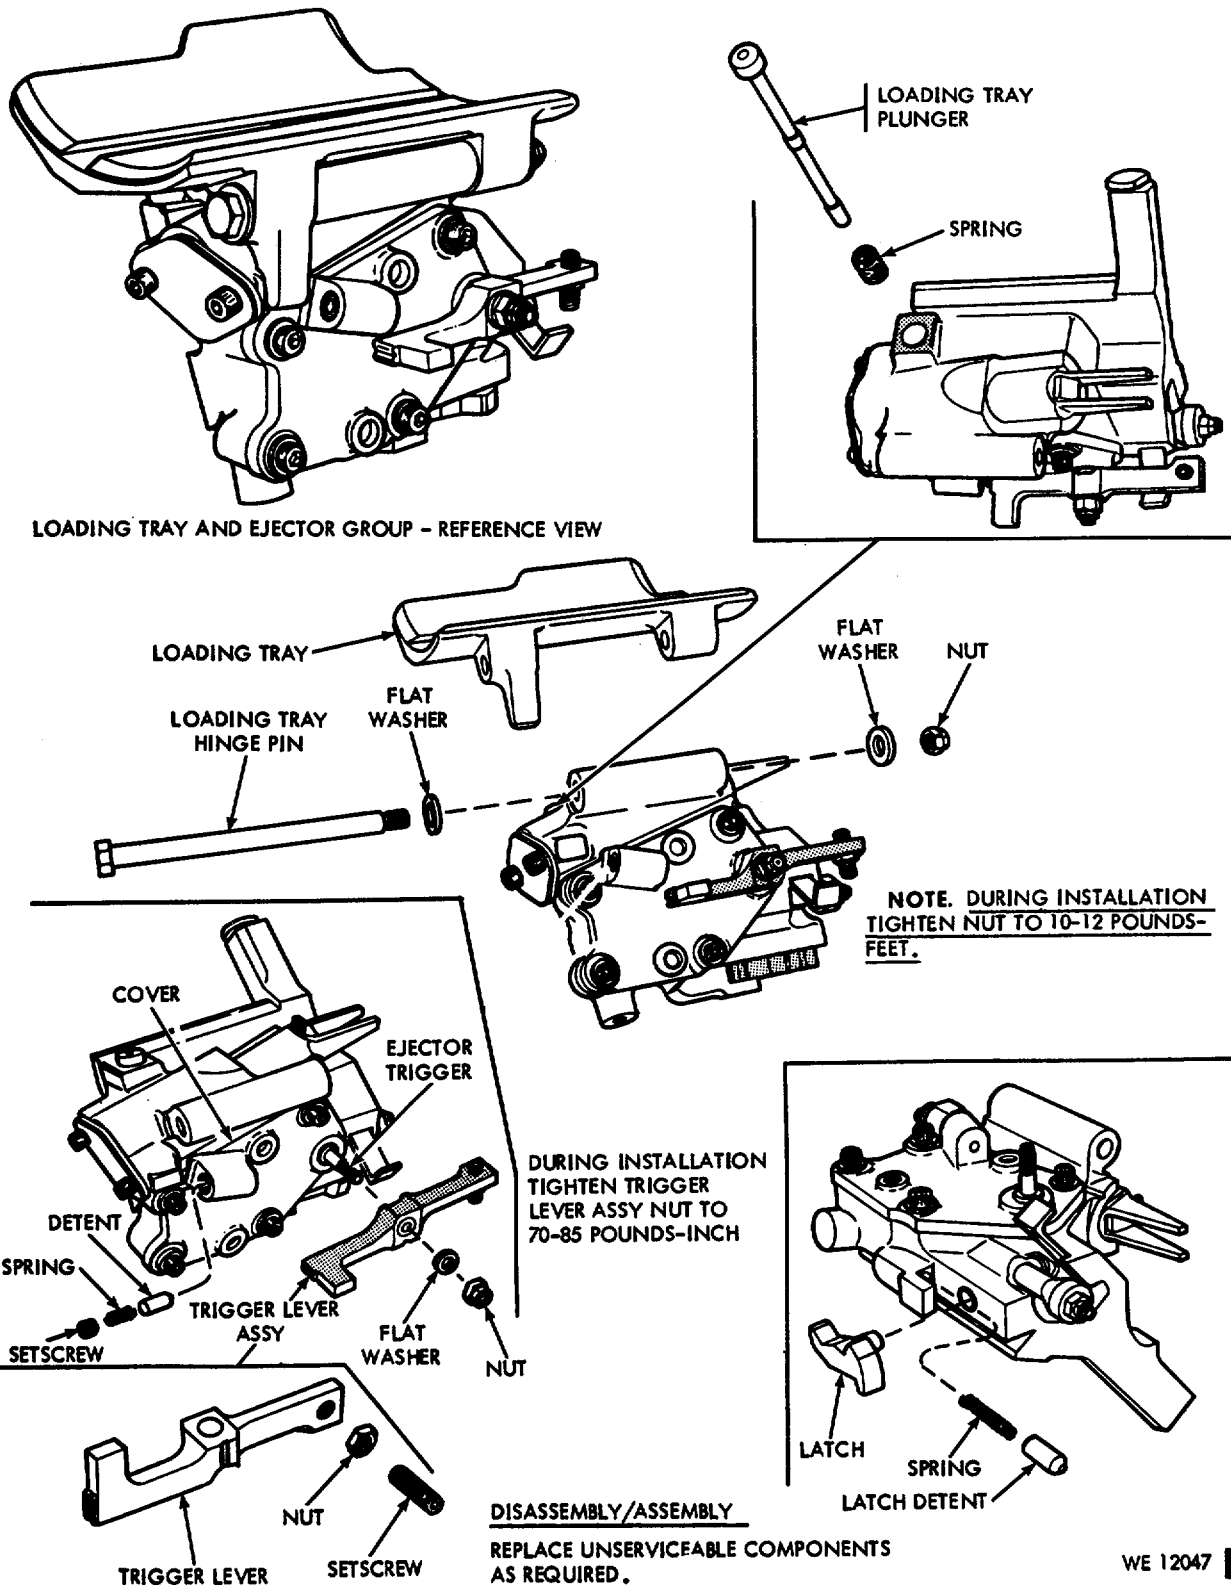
Disassembly/assembly - loading tray bracket assembly (1 of 3)
